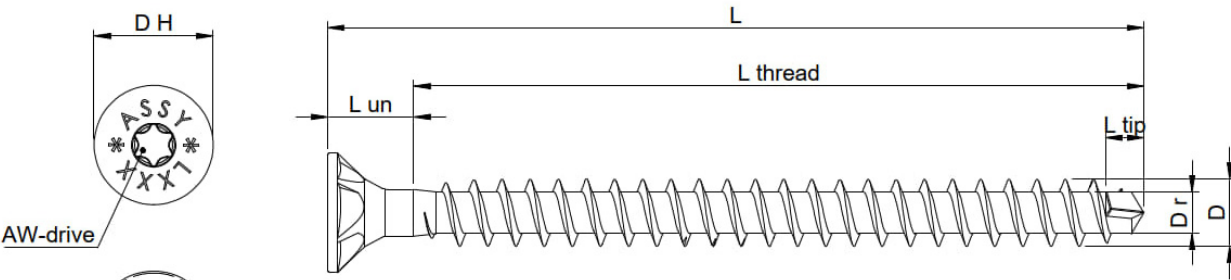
ASSYplus VG and ASSYplus VG 4 SCREW WITH COUNTERSUNK HEAD WITH MILLING POCKETS
